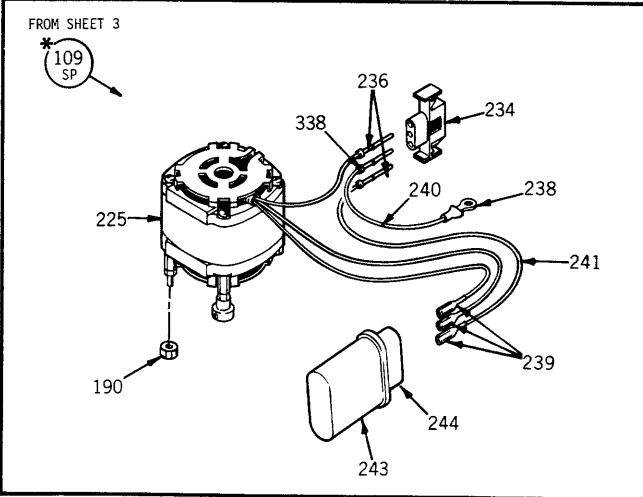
ACTUATOR AND CARRIAGE ASSEMBLIES
